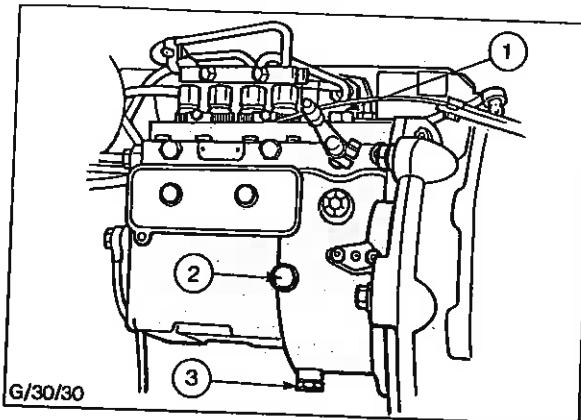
Injection Pump Oil Plugs (Class 'A' and Combine Harvester Governing only)
